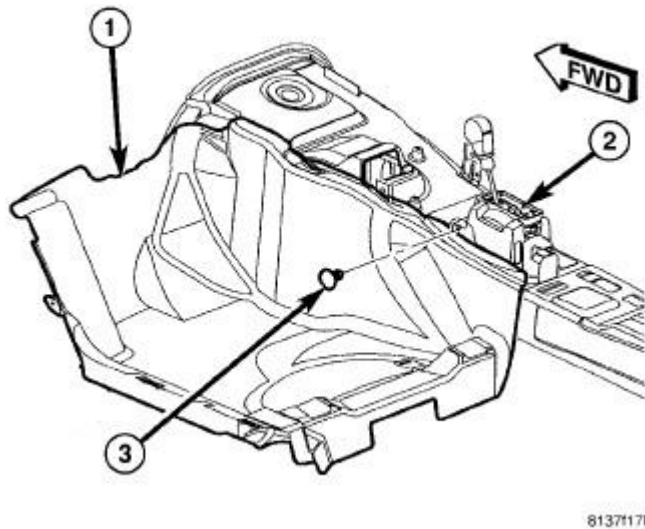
Front Carpet Push-Pin Fastener (Driverside Only)
